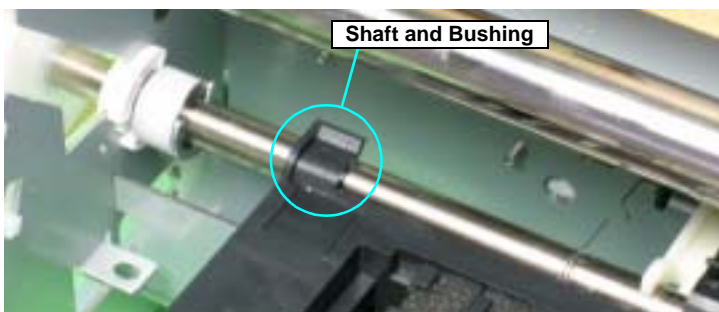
The PF Roller Shaft and the Bushing of the Front Paper Guide
